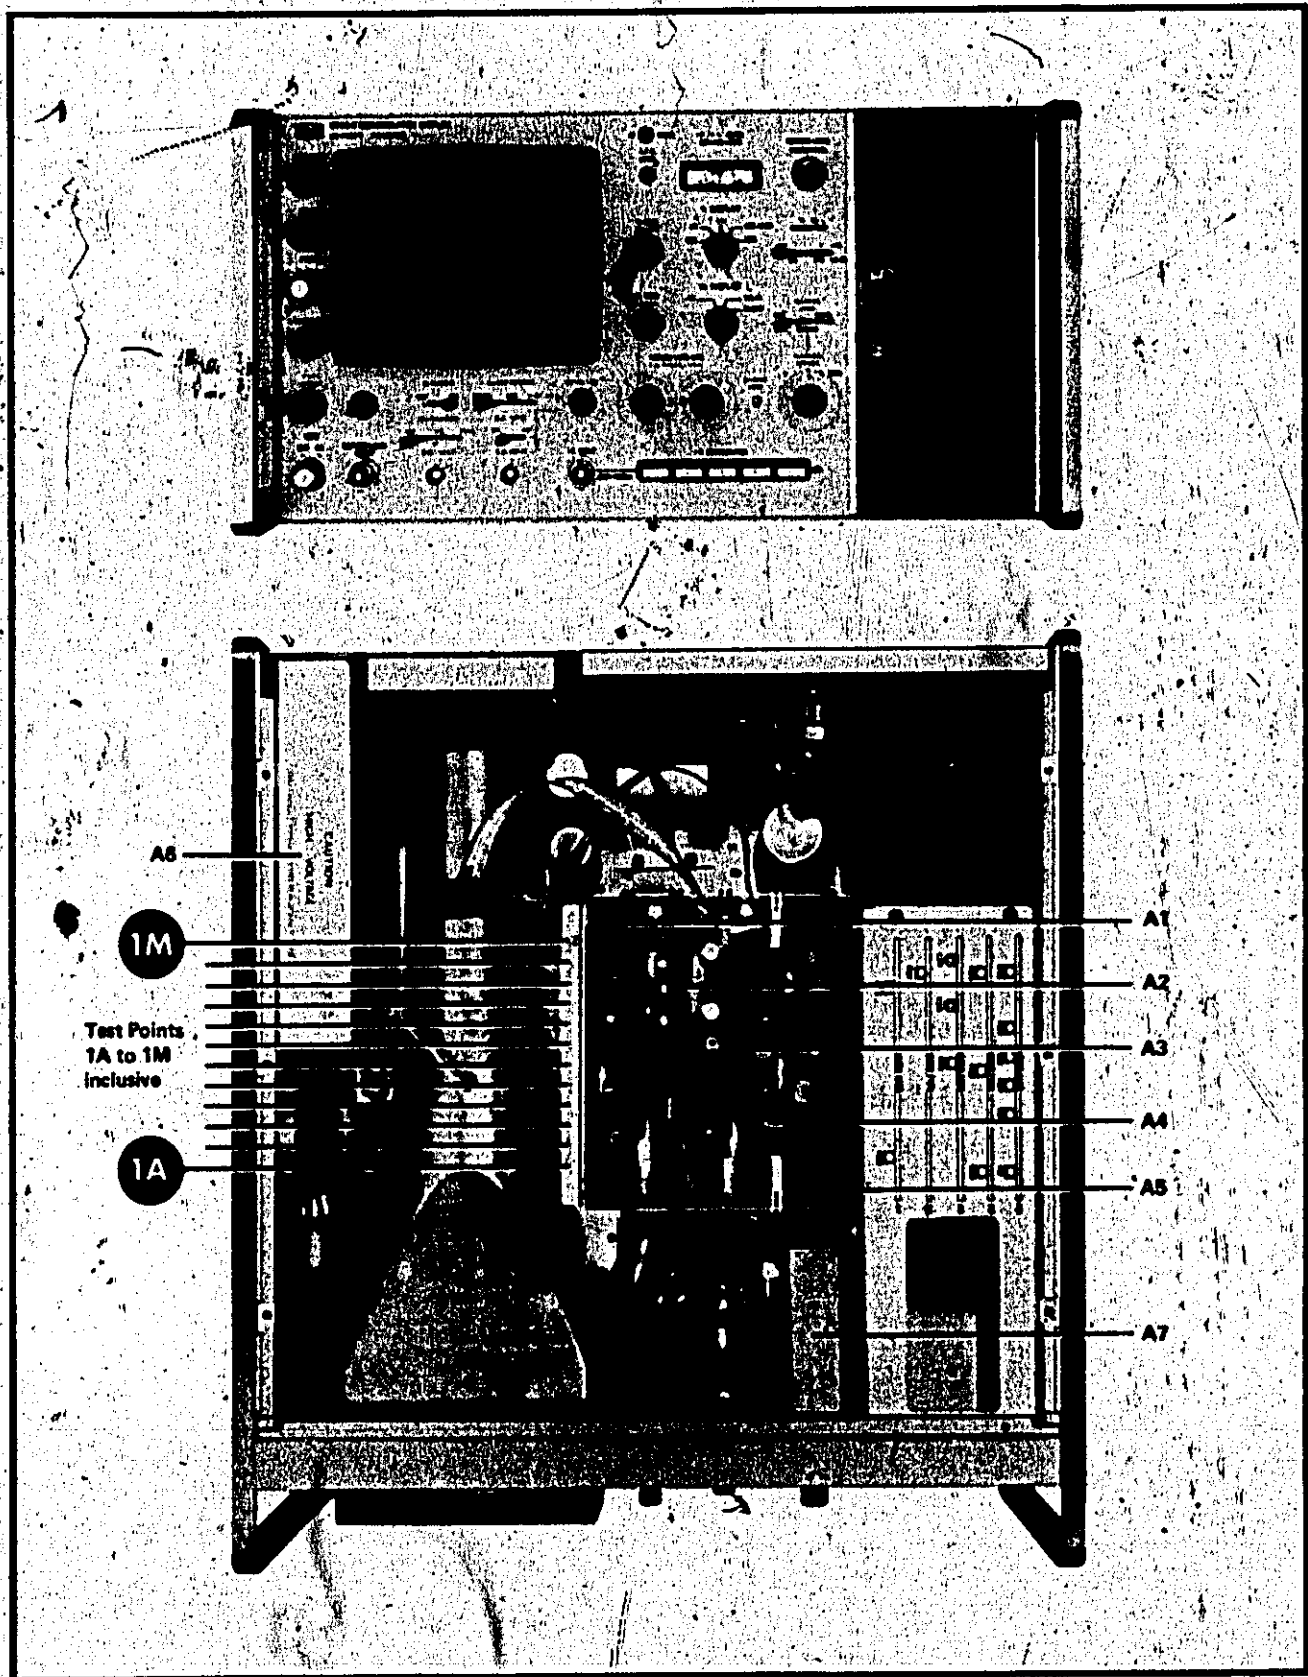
Assembly Locations - Front and Top Views of 3702B
